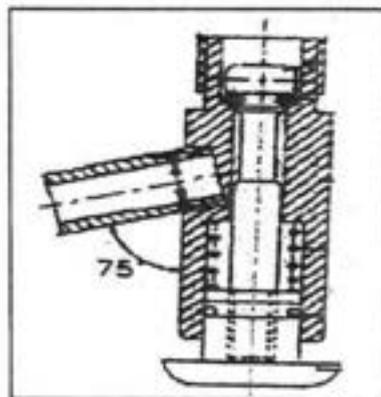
Cross Sectional View - Typical Sampling Valve
